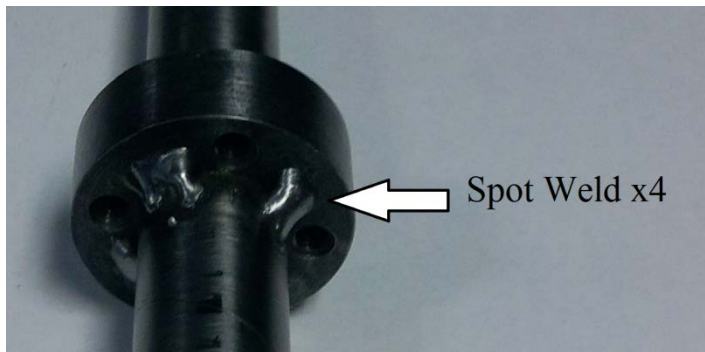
Image of the Welds created by Greg Overton attaching the collet to the shaft
